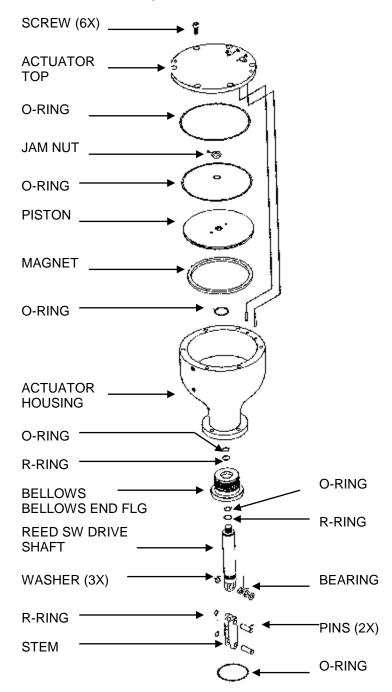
BELLOWS AND ACTUATOR ASSEMBLIES DRAWING
